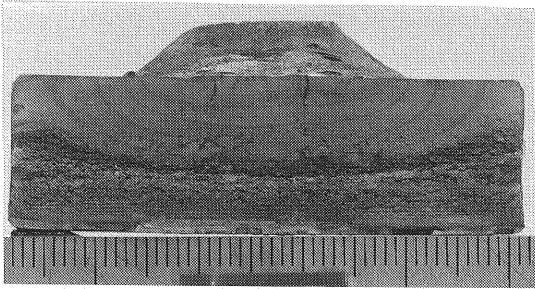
Fracture Surface (D-type, $S_r=225$ MPa).
